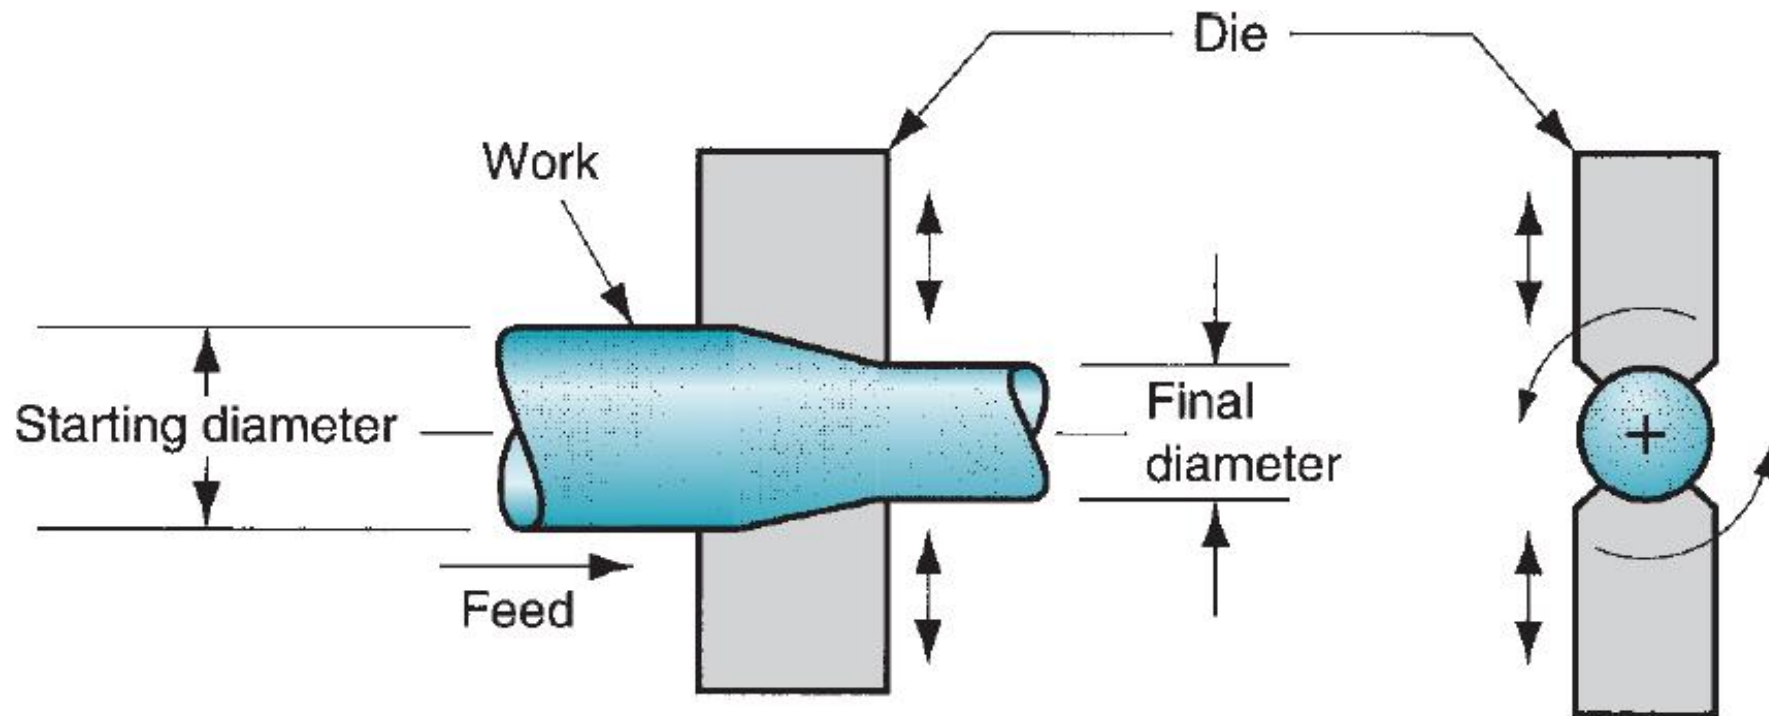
Swaging process to reduce solid rod stock; the dies rotate as they hammer the work. In radial forging, the workpiece rotates while the dies remain in a fixed orientation as they hammer the work.
